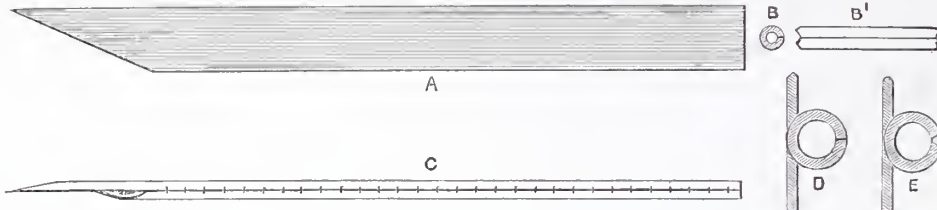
Diagrams showing Mode of making Simple Brooch Tongue—A, Flatted Metal; B, Metal turned up, transverse section; B', Ditto, Elevation showing Joint; C, Tongue complete; D, Joint rightly made; E, Joint badly made.
